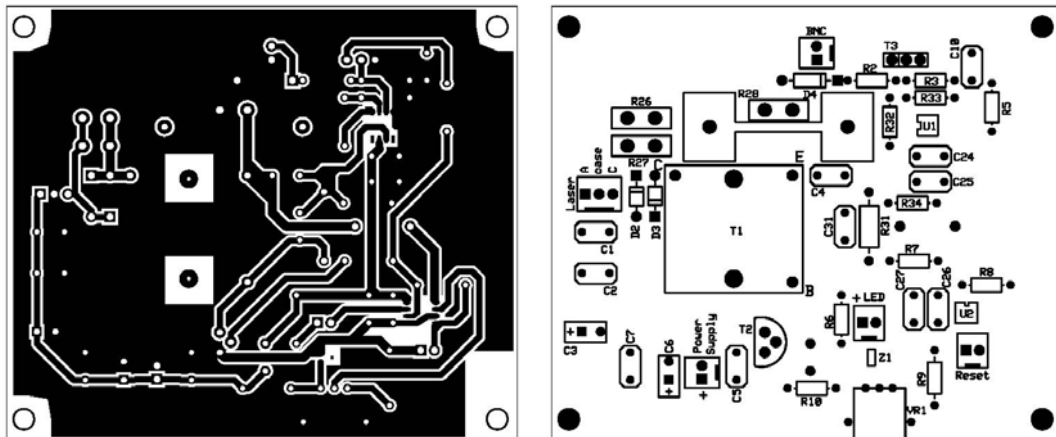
Circuit board diagram of the reengineered laser driver circuit. The bottom copper layer of the printed circuit board (PCB) is shown on the left, and the silk screen layer, with all the component descriptions, is shown on the right.
